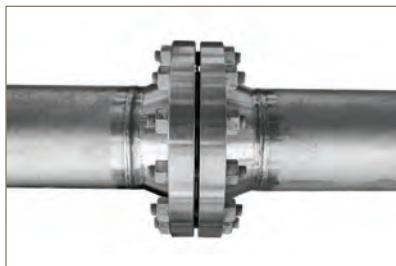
Two butt weld flanges being aligned prior to final installation.
